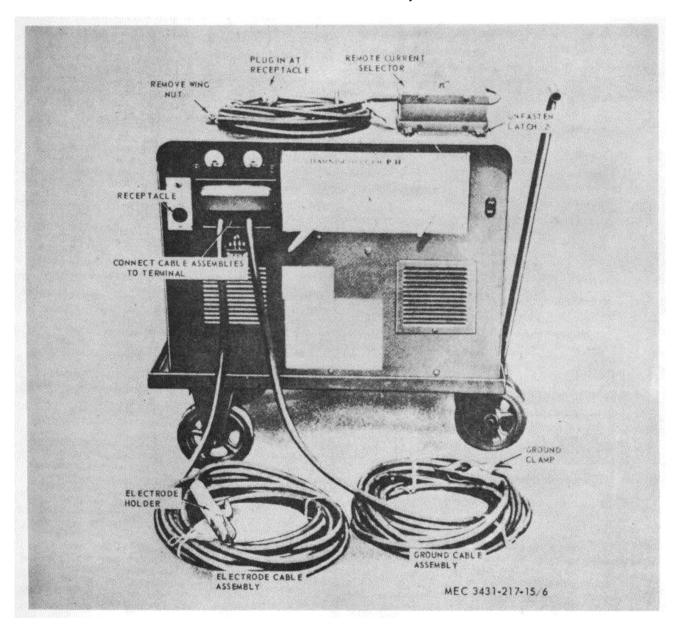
Welding cables and remote rheostat current selector assembly connection., removal and installation.
